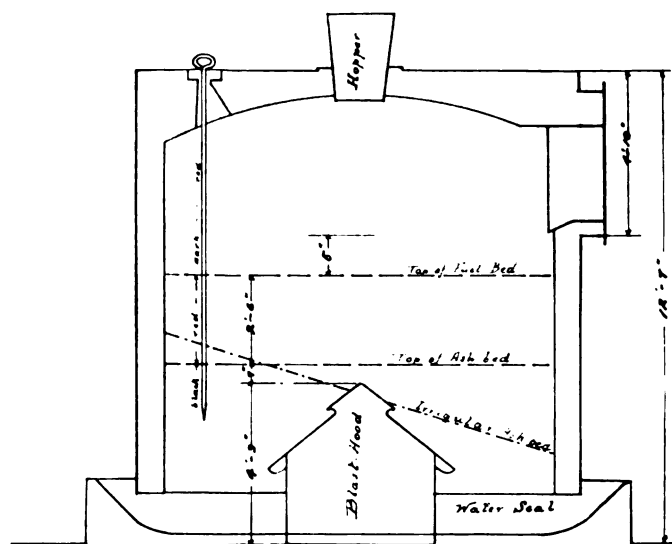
Section through producer, showing thickness of ash bed and fuel bed.
